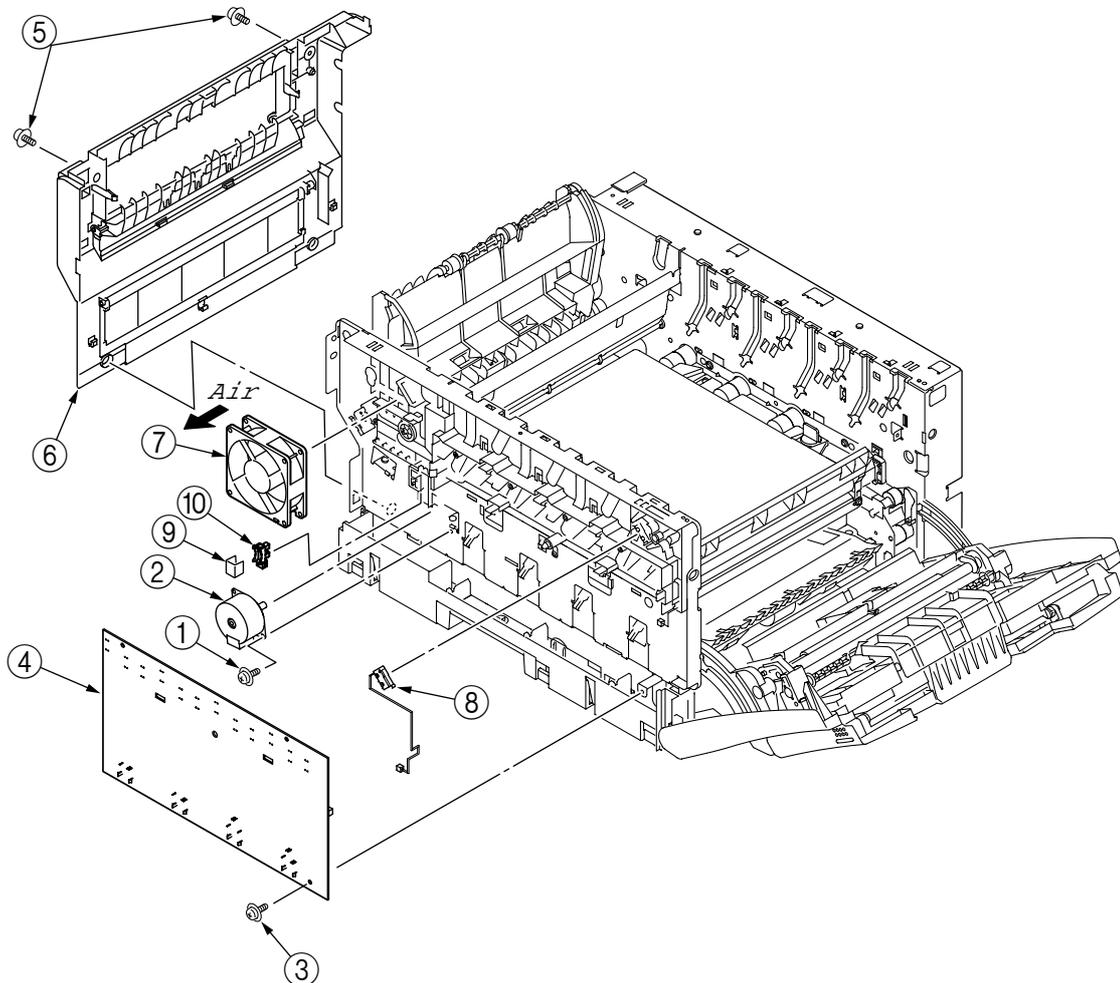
FAN (Fuser) / Belt Motor / High Voltage Power Supply Board / Cover Open Switch / Image Drum Up/Down Sensor
